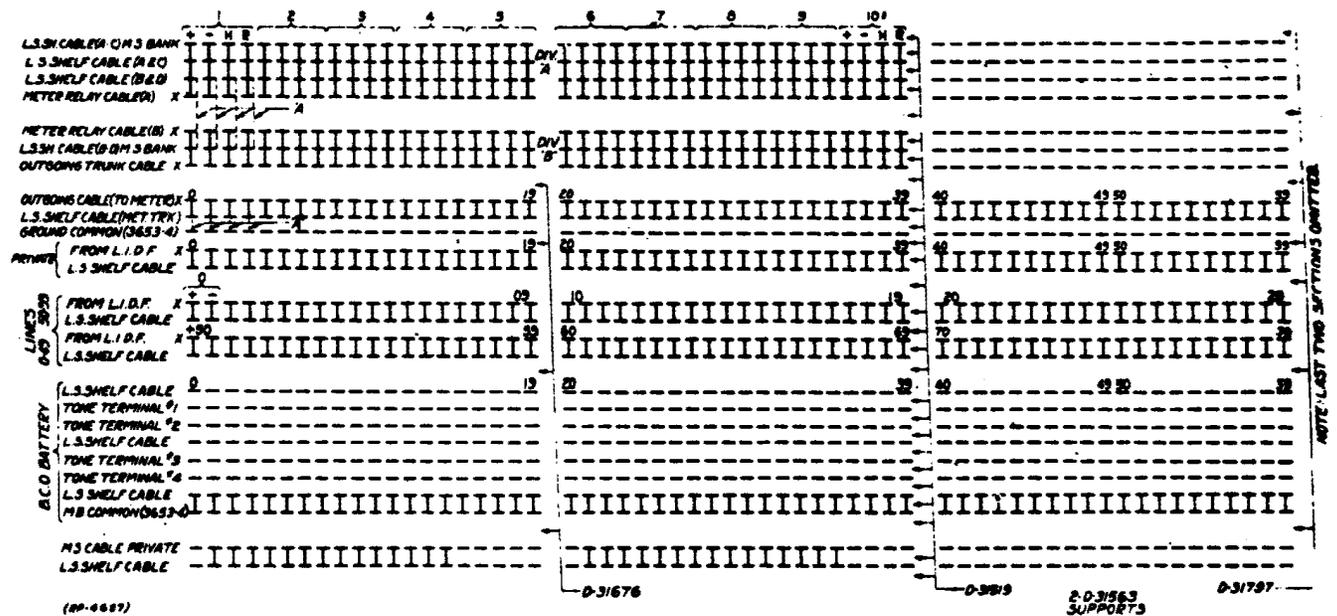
TYPICAL LINE SWITCH TERMINAL ASSEMBLY DRAWING
